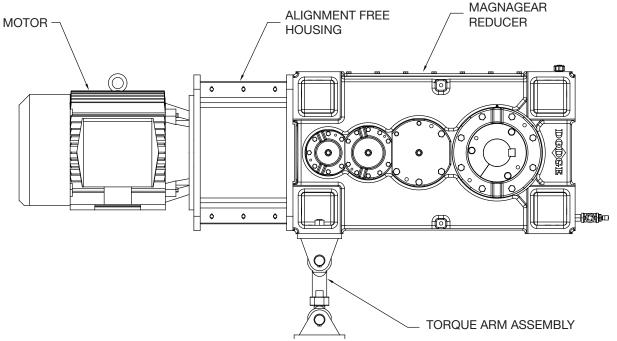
Typical Alignment Free Mounting of Hollow Bore Reducer
